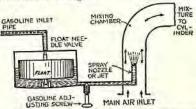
Early type of carburetor with float mechanism main air inlet" is provided.
